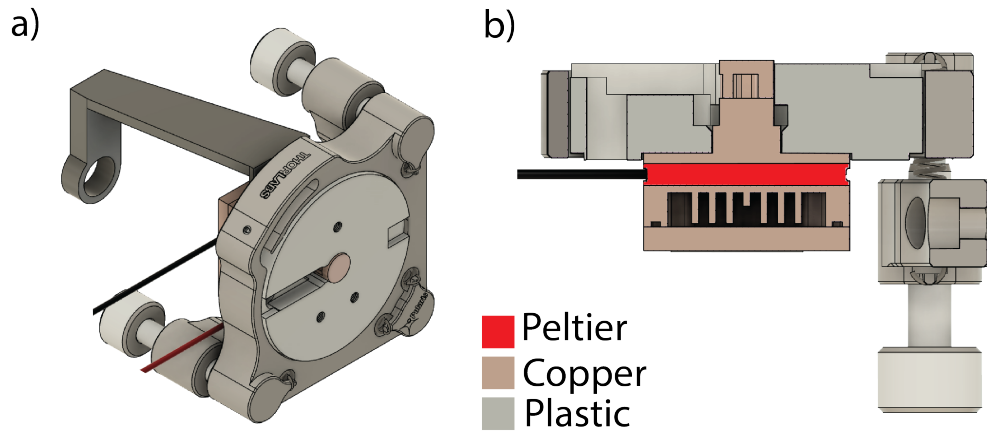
a) 3D model of the sample holder. b) cross-sectional view of the sample holder.
